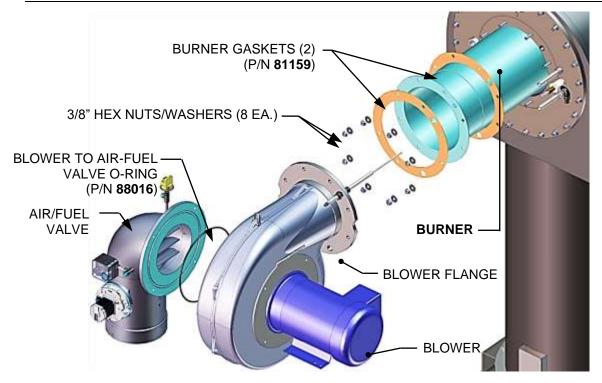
Burner Assembly Exploded View - BMK5000 & 6000
